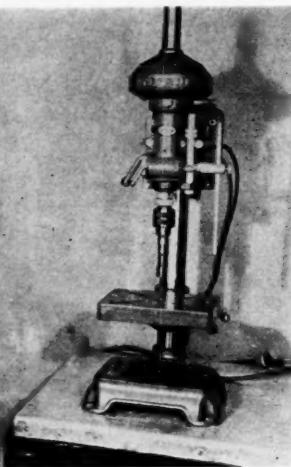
B. Drill Press with Slotted Die for Preparing Test Pieces
